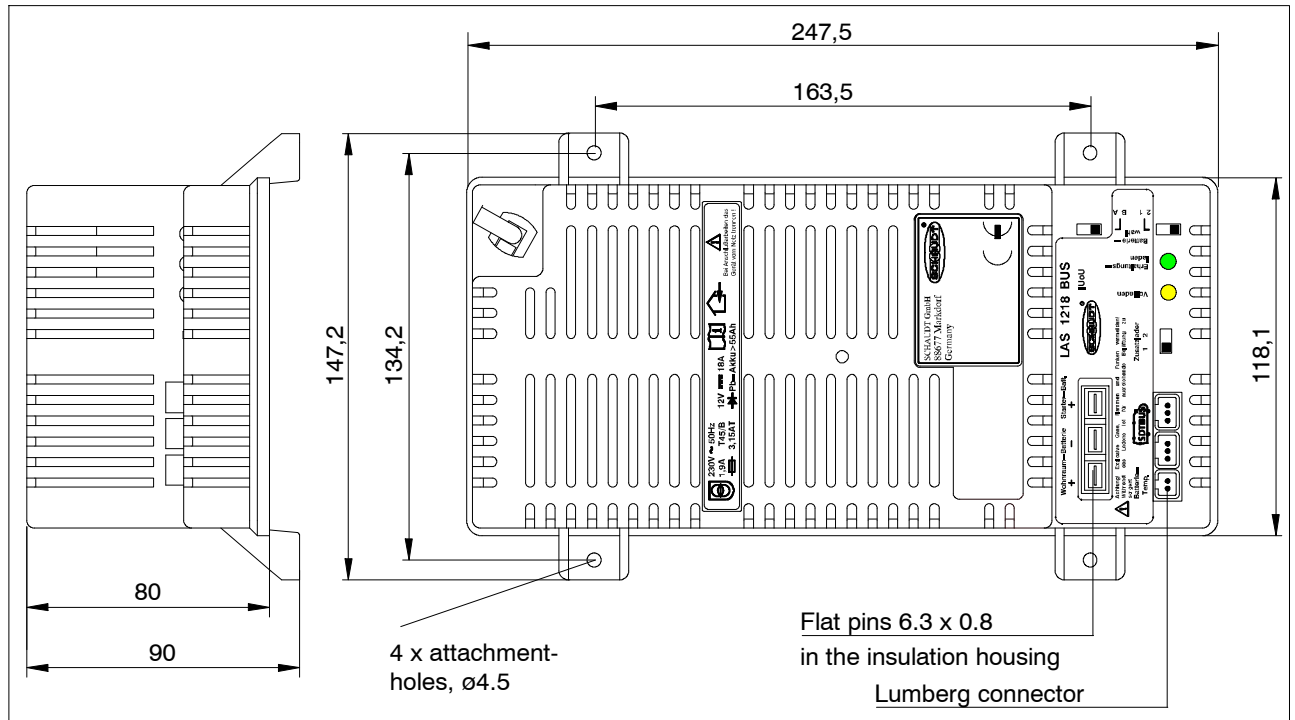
Dimension diagram for LAS 1218 BUS battery charger (dimensions in mm)
